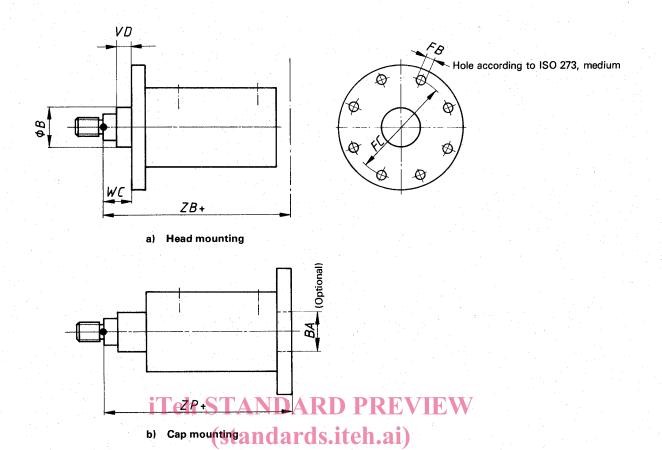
MF3 THSHead circular flange mounting https://standards.iteh.ai/MF4 grsCaparcircular flange mounting-a53c-cf03e1b2bcc7/sist-iso-6020-1-1998
